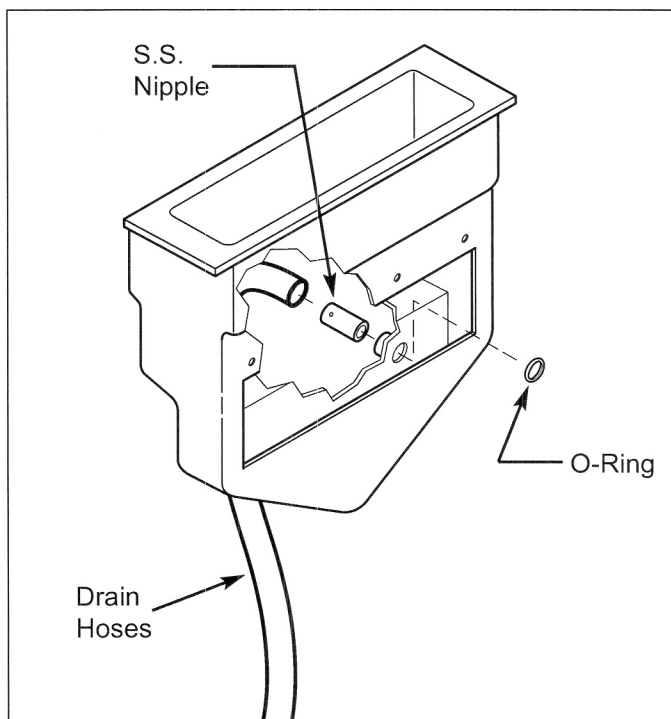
Drain Hose, O-Ring & SS Nipple Removal
